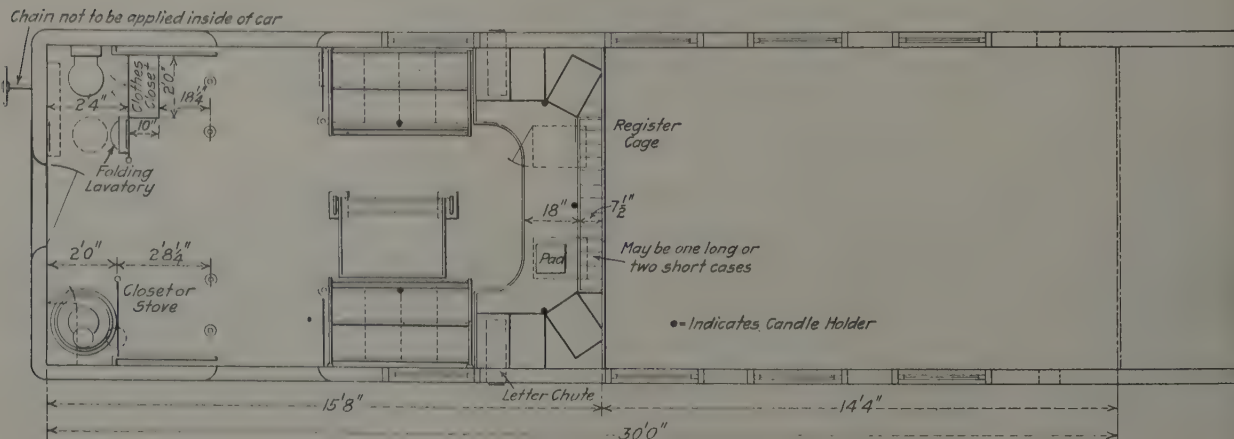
Optional Floor Plan for 15-ft. and 30-ft. Compartments.
